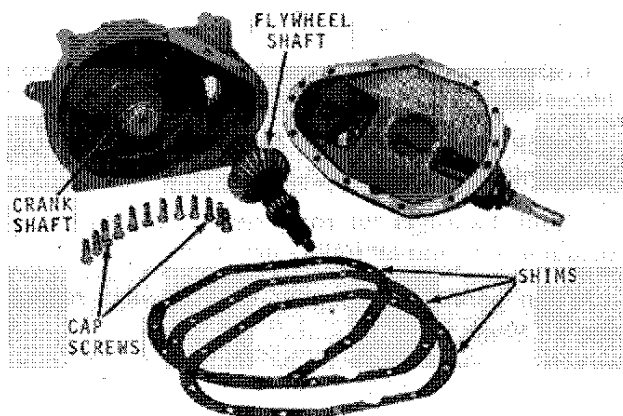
Separating Gear Halves and Removing Flywheel Shaft and Crankshaft
